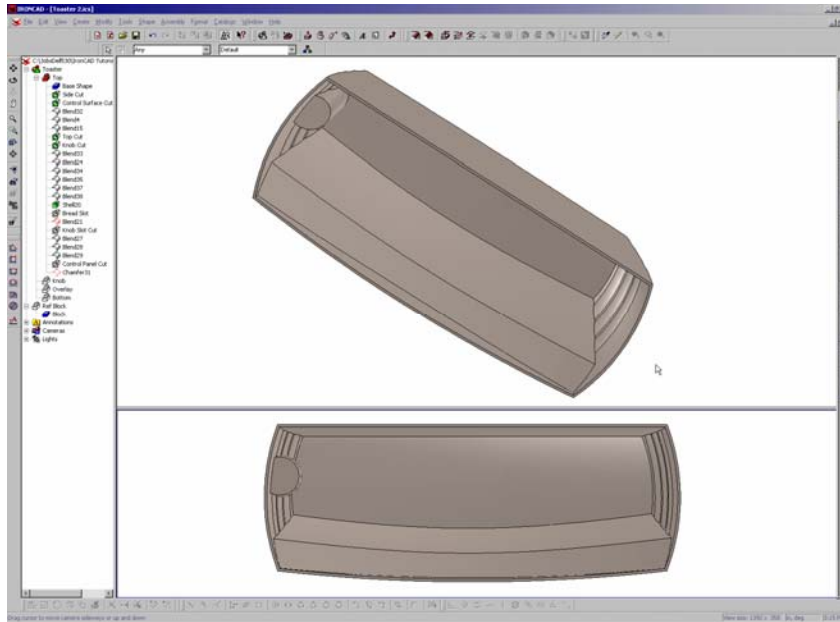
The Shelled Toaster Top Part, Perspective and Bottom Views
